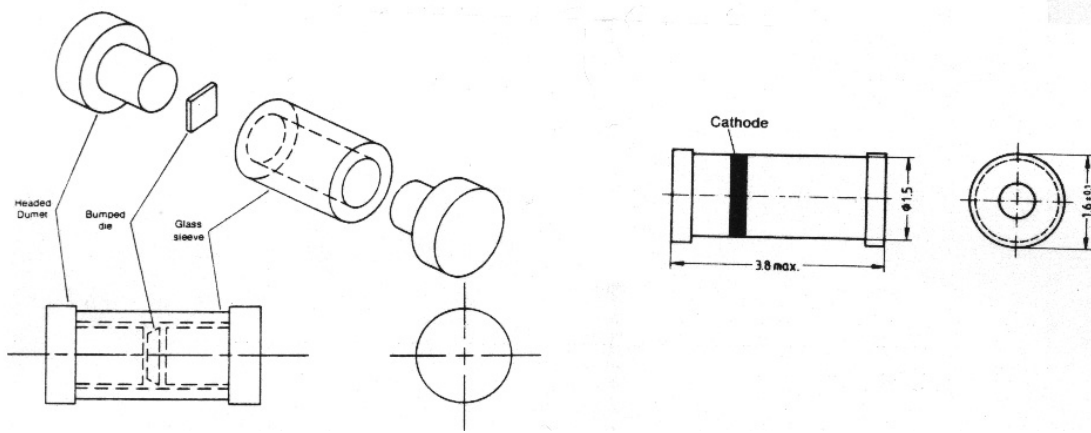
MELF-package for SMD diodes. The standard size is designated SOD-80, with dimensions shown to the right.
